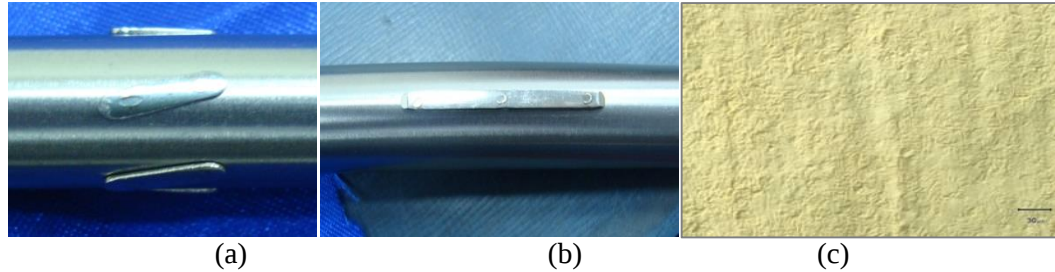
(a) Resistance welded spacer pad; (b) Resistance welded bearing pad; (c) Microstructure at weld interface of spacer and bearing pad viewed at 50x magnification
